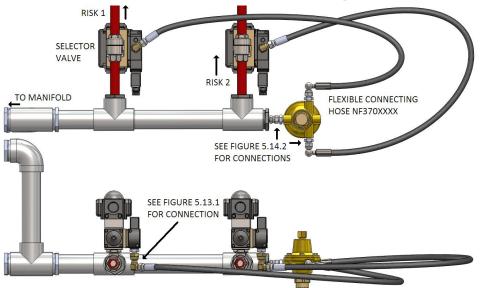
Pressure Regulator, Selector Valves, Connecting Hoses and Fittings. Back view (Top), Plan view (Bottom).
